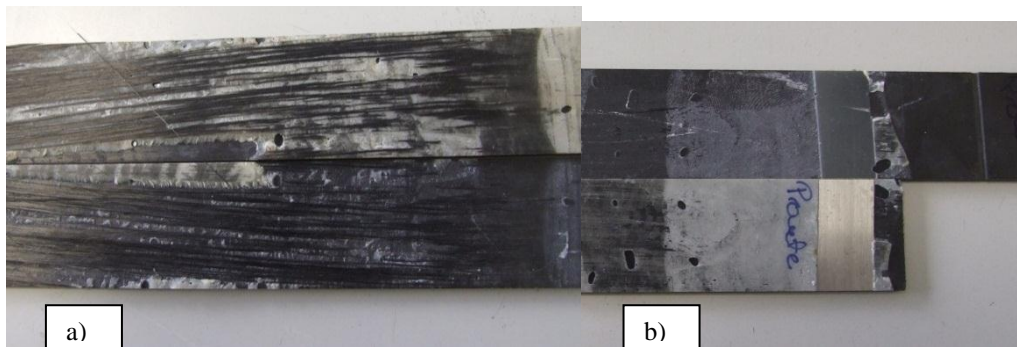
Fracture surfaces of the specimens tested with 70% of the load; a) delamination, b) cohesive failure in the adhesive.
